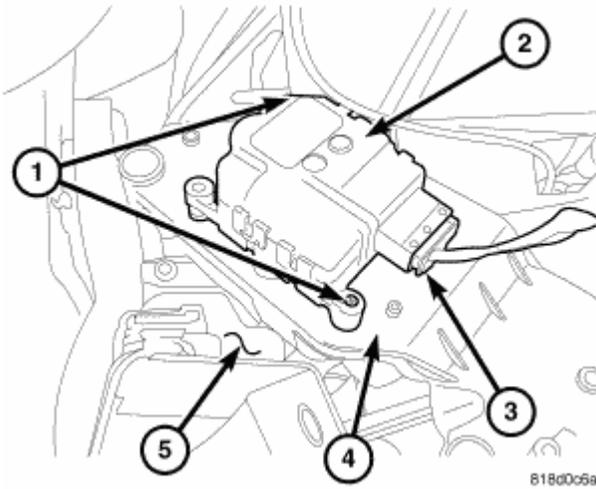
Identifying Screws, Mode Door Actuator, Wire Harness Connector, Actuator Mounting Bracket & Air Distribution Housing
